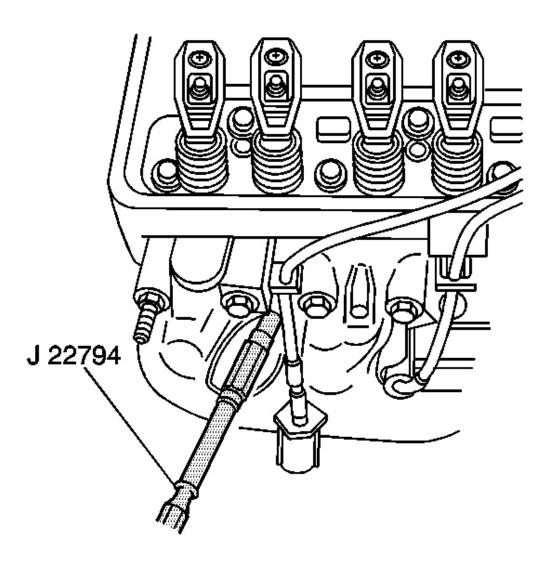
Installing J 22794 Into Spark Plug Hole Courtesy of GENERAL MOTORS CORP.
